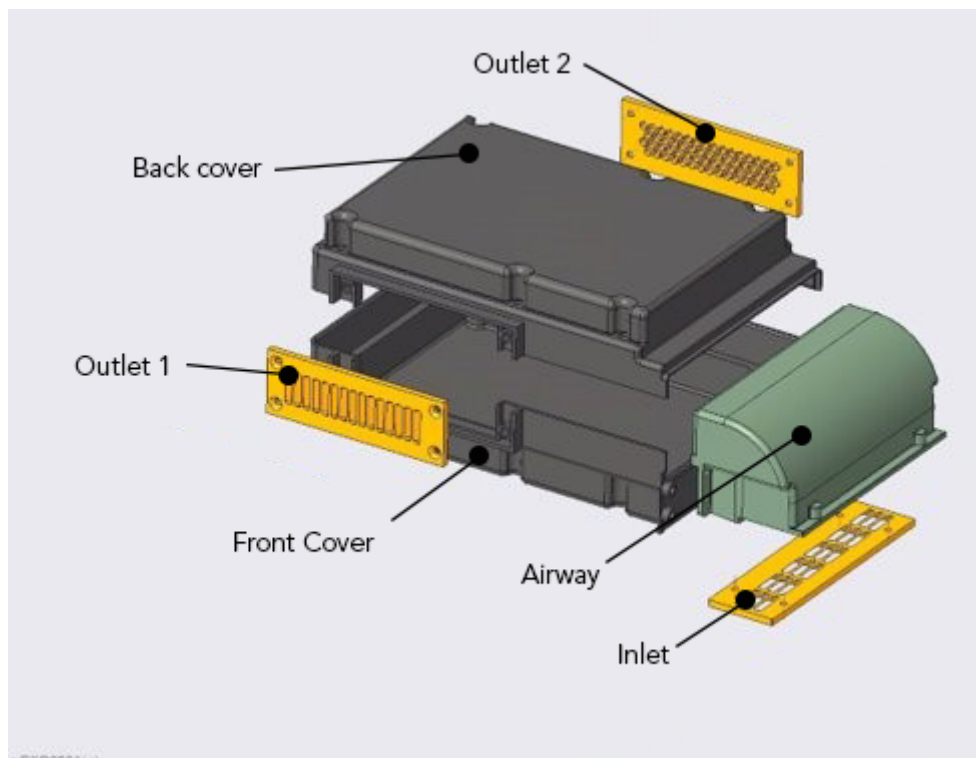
Exploded view of the test model showing the design of the manufactured parts.
